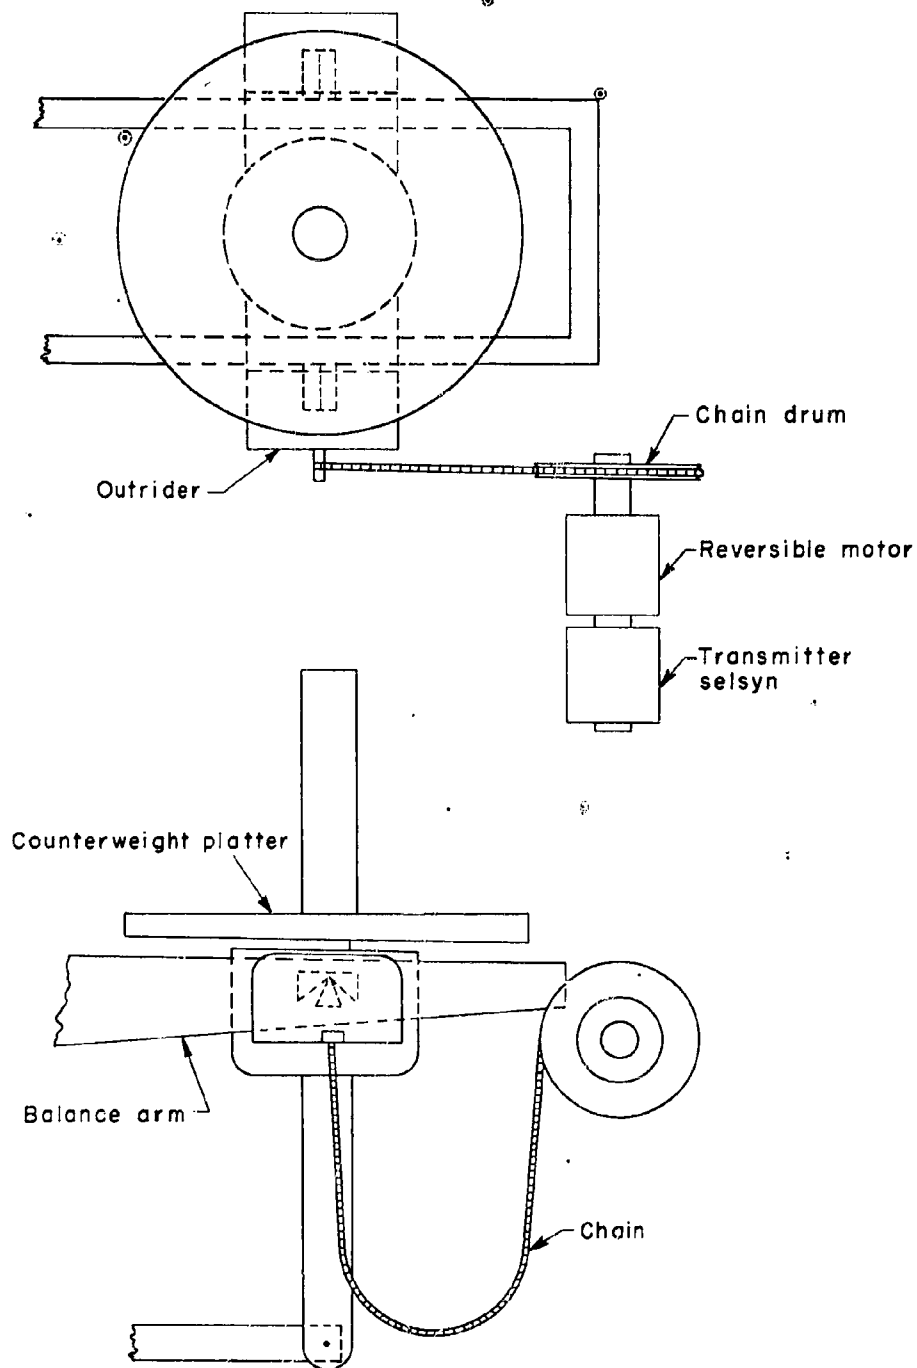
TOP AND SIDE VIEWS OF CHAIN-TYPE
